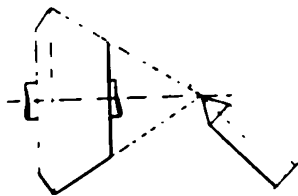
Adjustment of Blank in relation to Machine Centre.
